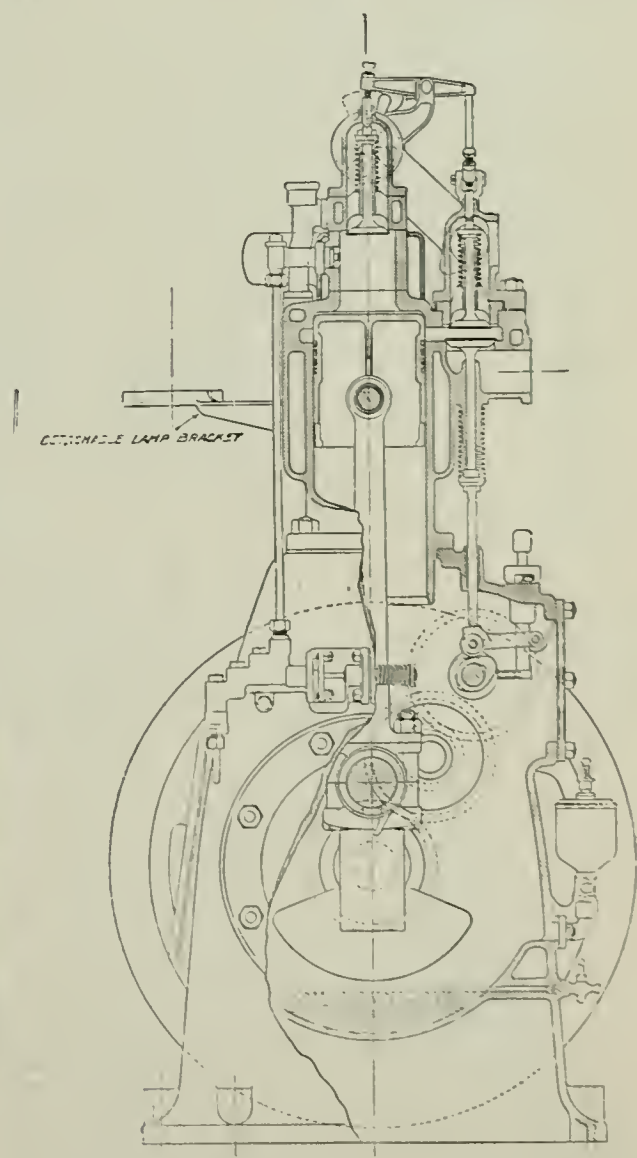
SECTION OF 10-H.P. CROSS OIL ENGINE.
